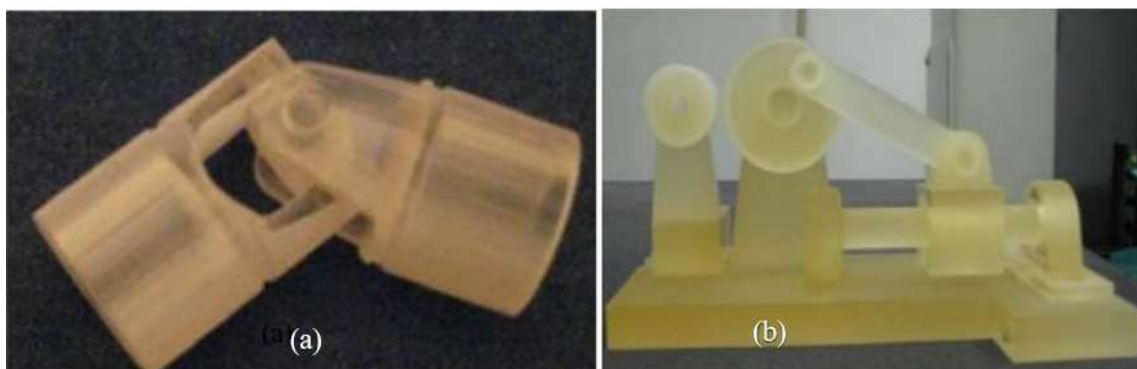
Direct Production Of Assemblies (a) joints; (b) crank and slider mechanism [59]
